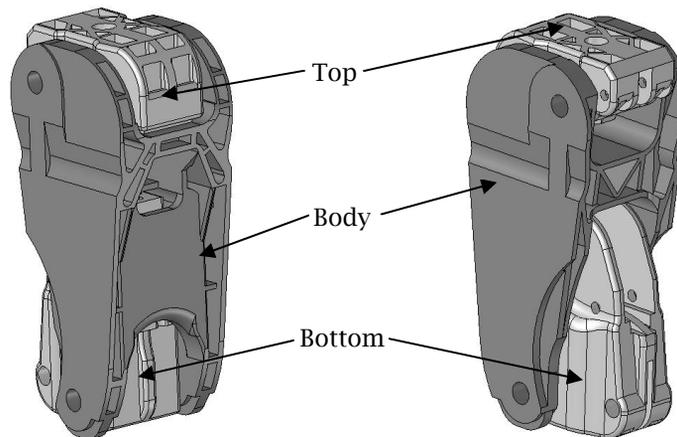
The final optimized knee geometry showing both front and rear angle views.
